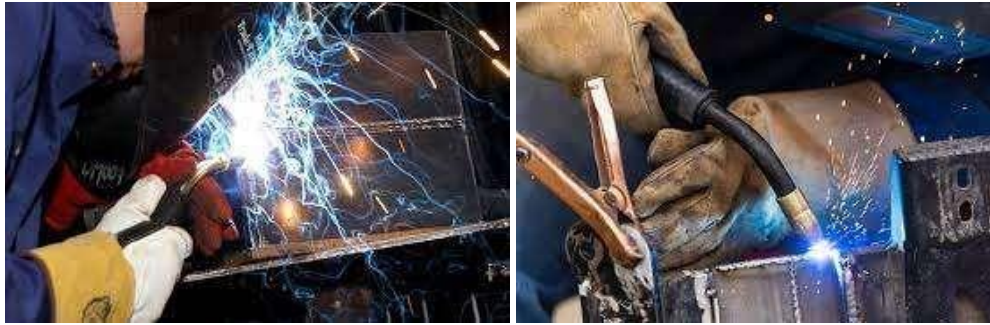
Examples of metal inert gas welding (Sild, 2023)
